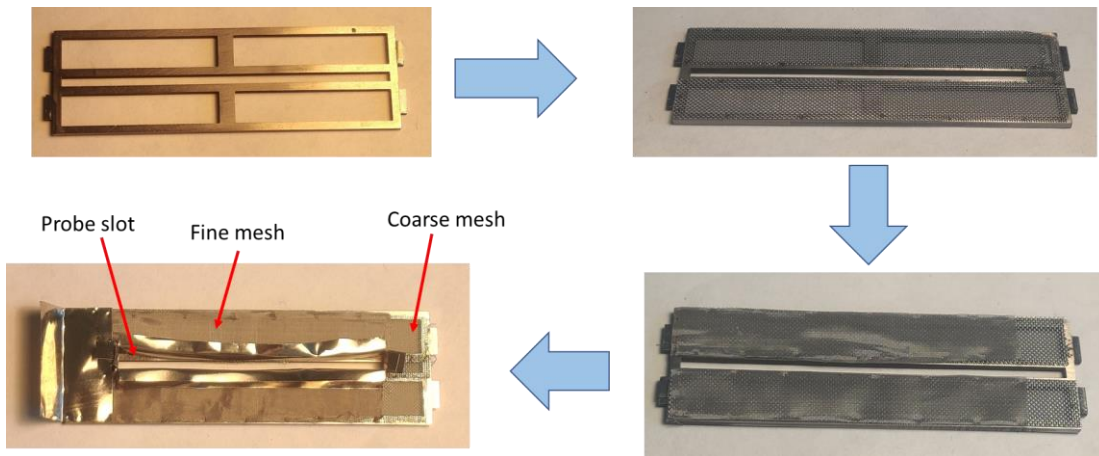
Process Of Fabricating the β -ZFR Mesh. One Layer Of Fine Mesh Covers One Layer Of Structural Coarse Mesh Before Spotwelding the Stainless Steel Spill Protecting Flow Guides.
